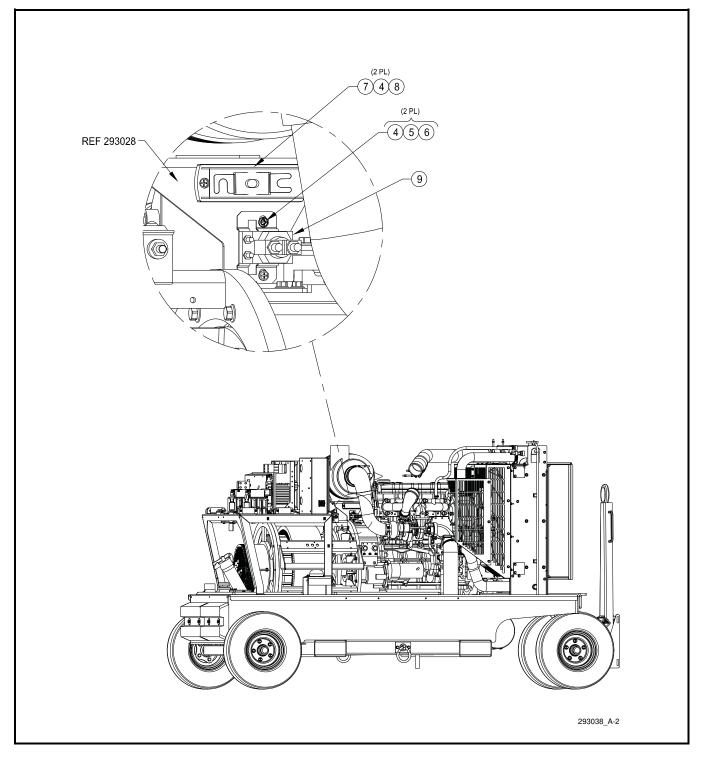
Electrical System Installation, 4400 (Sheet 2)
